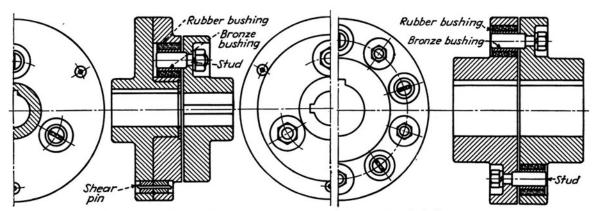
A Foote Gear Works flexible coupling which has shear pins in a separate set of bushings to provide overload protection. The principle is similar to that shown in Fig. 264. Replaceable shear pins are made of softer material than the shear-pin bushings.
